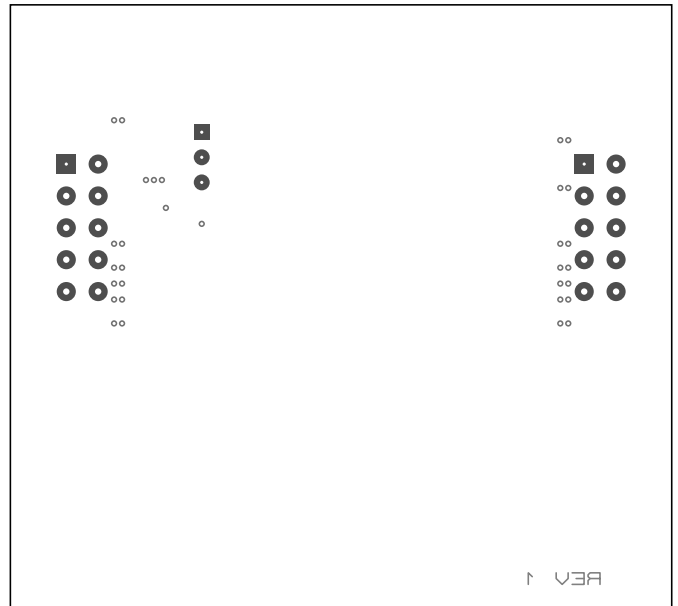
LTM2883 Low EMI Demo Board Layout (DC1748A)
